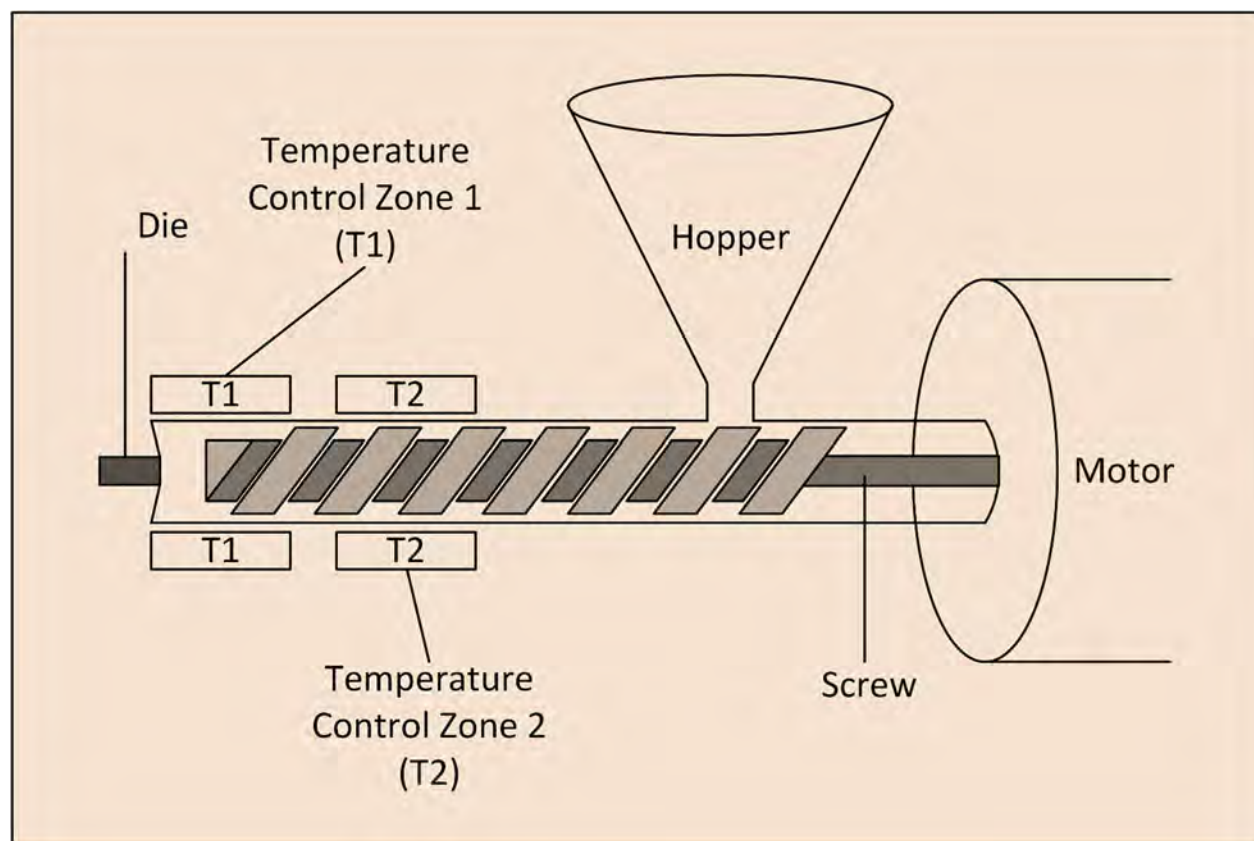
Single-screw extruder assembly and temperature control zones.
